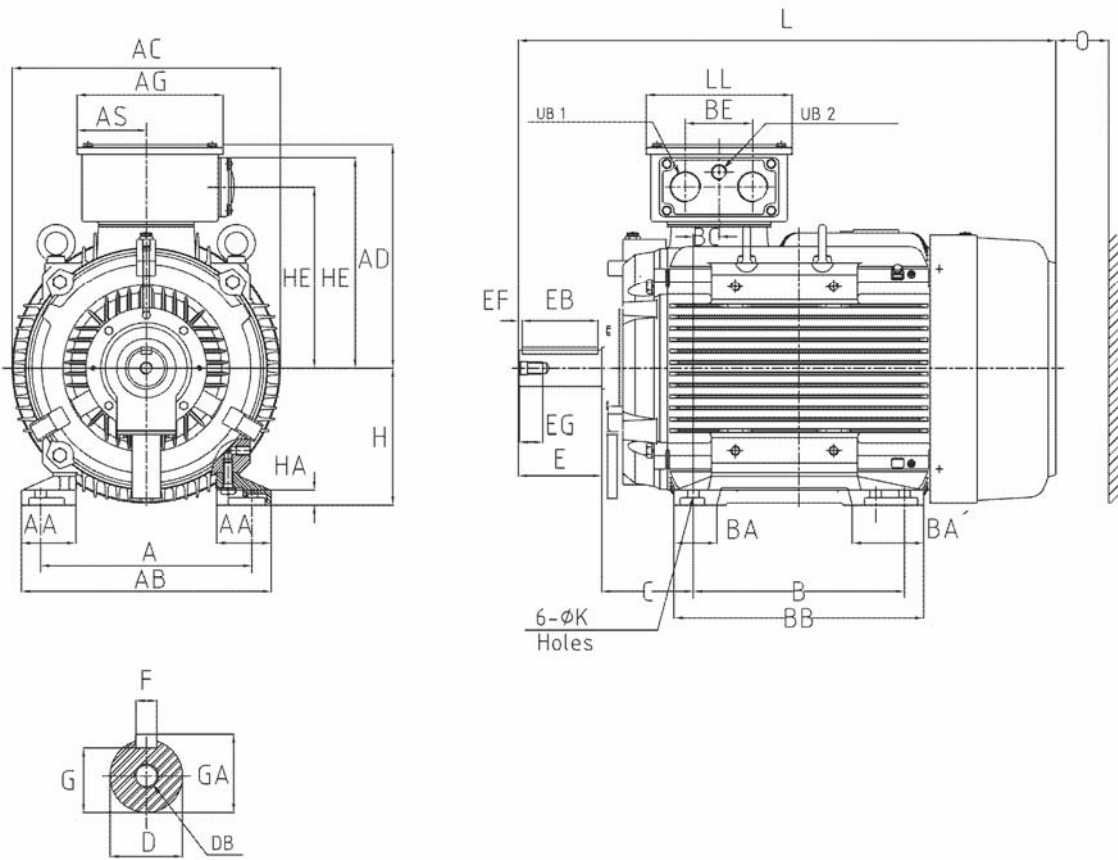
Outline drawing of cast iron design, feet version, mounting B3; frame size 160 - 180
